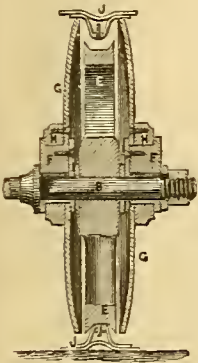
of the accompanying engravings represents a side elevation of the lower part of a waggon or truck fitted with these improvements. Fig. 2 represents an enlarged sectional edge view of one of the bearing wheels, showing the endless chain of rails resting at top, on its accompanying pair of eccentric disc wheels. A, is the body frame or
